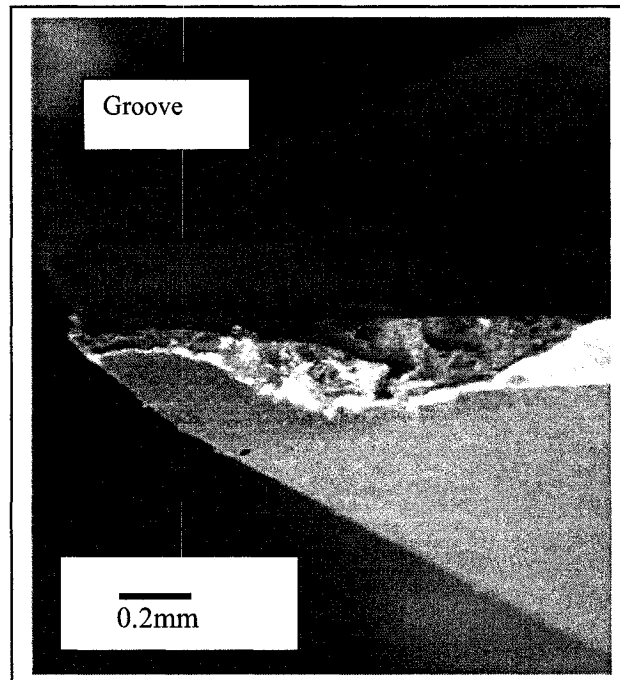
Wear surface, cutting speed = 70 m/min (1170 rpm), depth of cut = 2.5 mm, feed = 0.025 mm/tooth, unstable (chatter)
